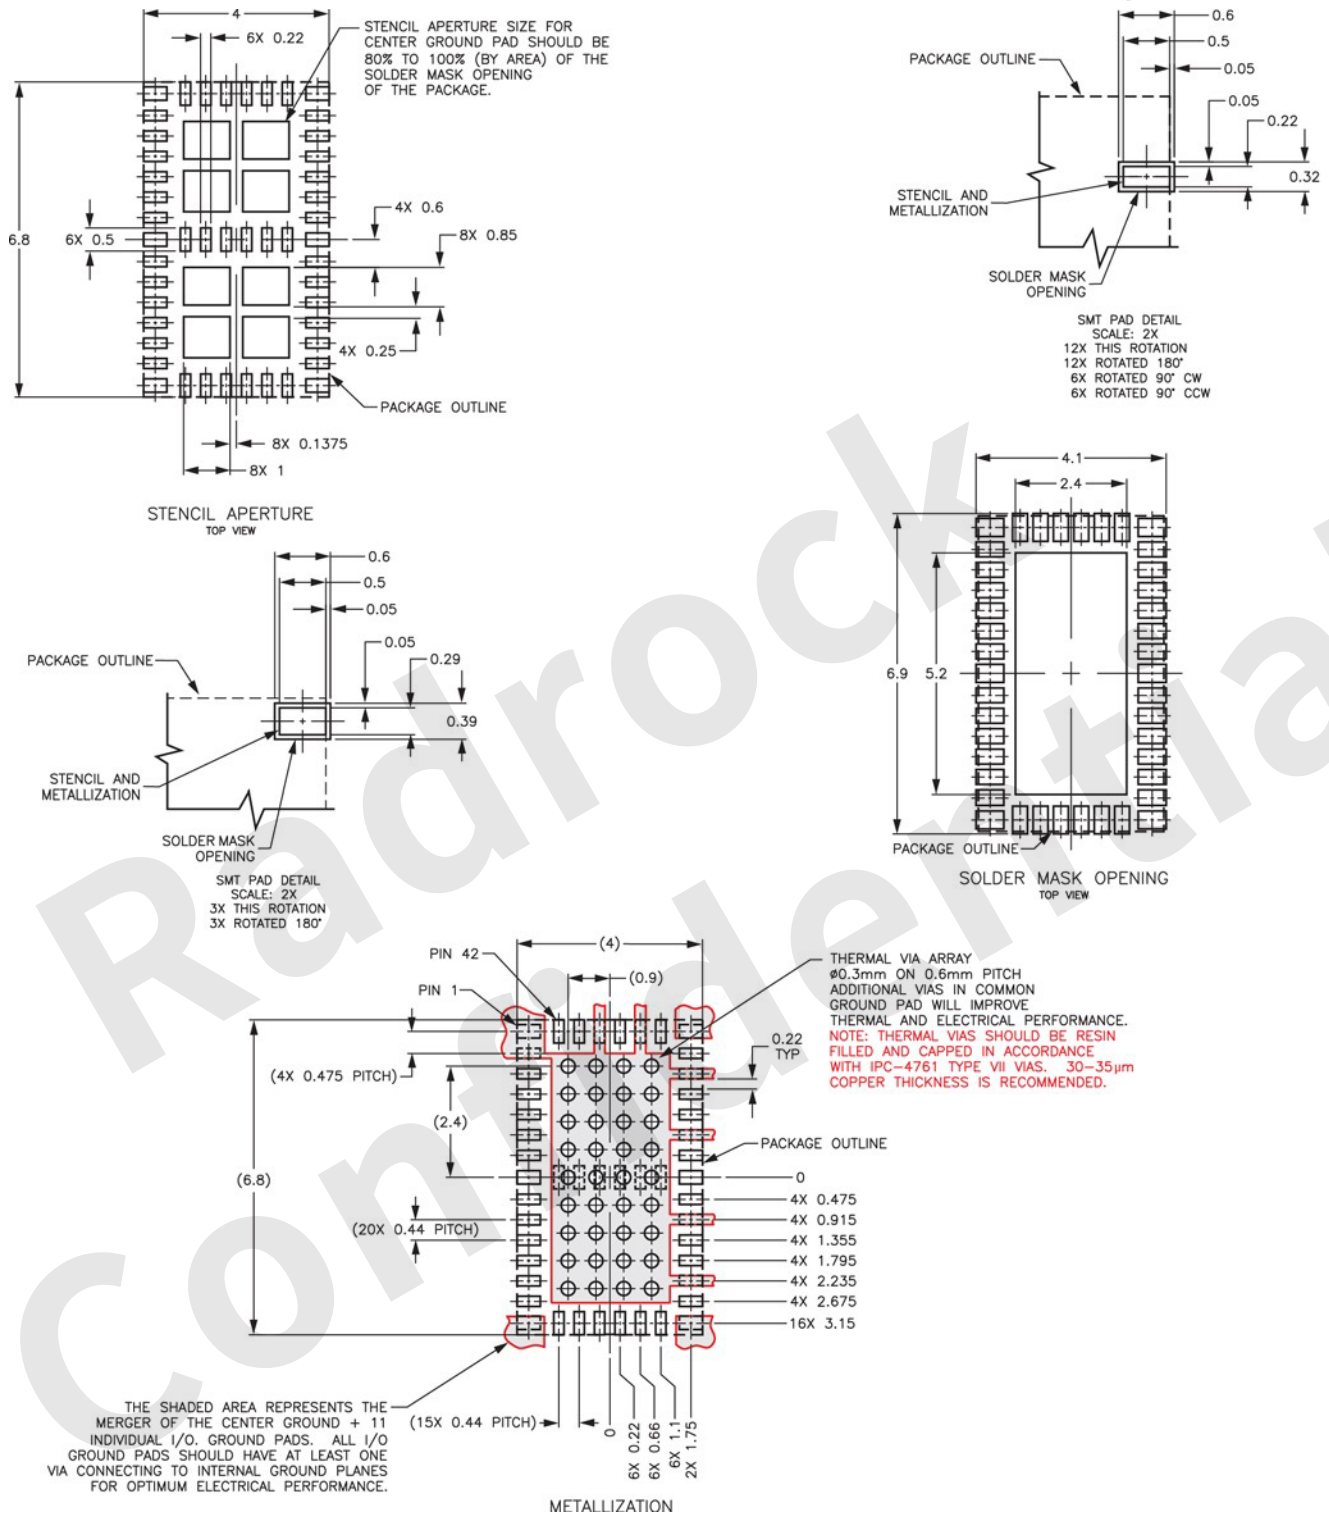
PCB Layout Footprint for 4.0 mm x 6.8 mm, 42-Pad Package – RR88643
